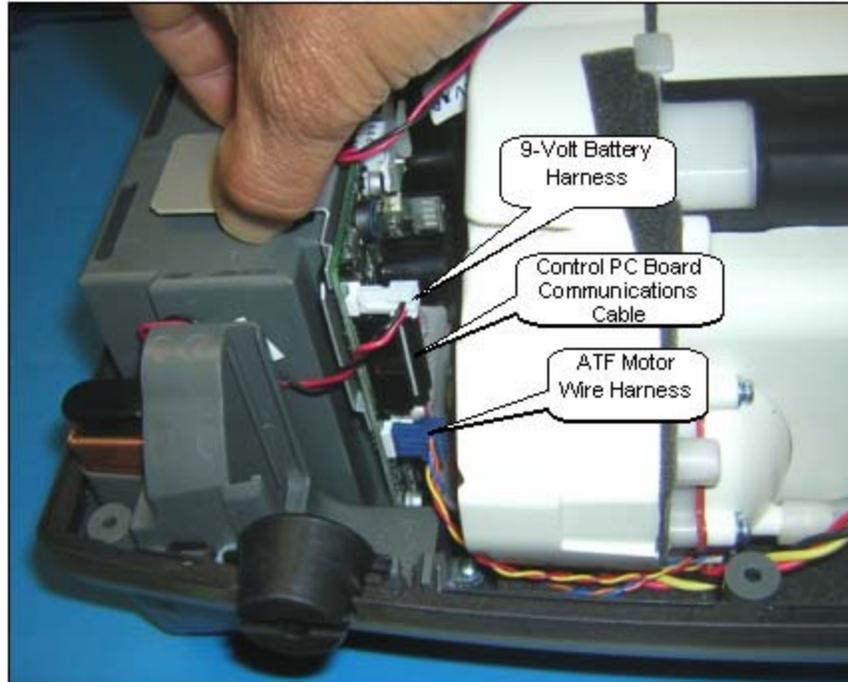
ATF Motor, 9-Volt Battery, and Control PC Board Communications Wire Harness Removal.
